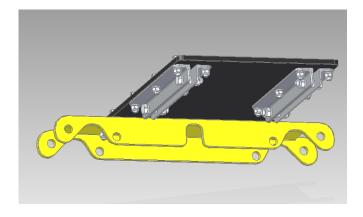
Top plate with mounted steel angle bracket joints and UNP-beam.
